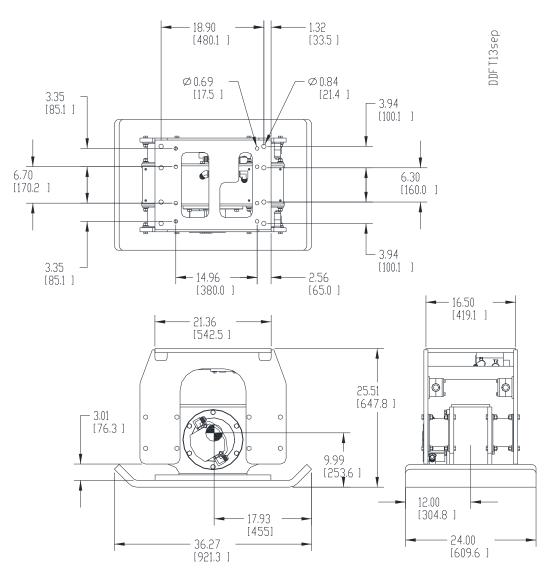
1000B Shown with Flat Top Mounting Frame (BR / SR Bolt Hole Pattern) Indicates Center of Gravity
